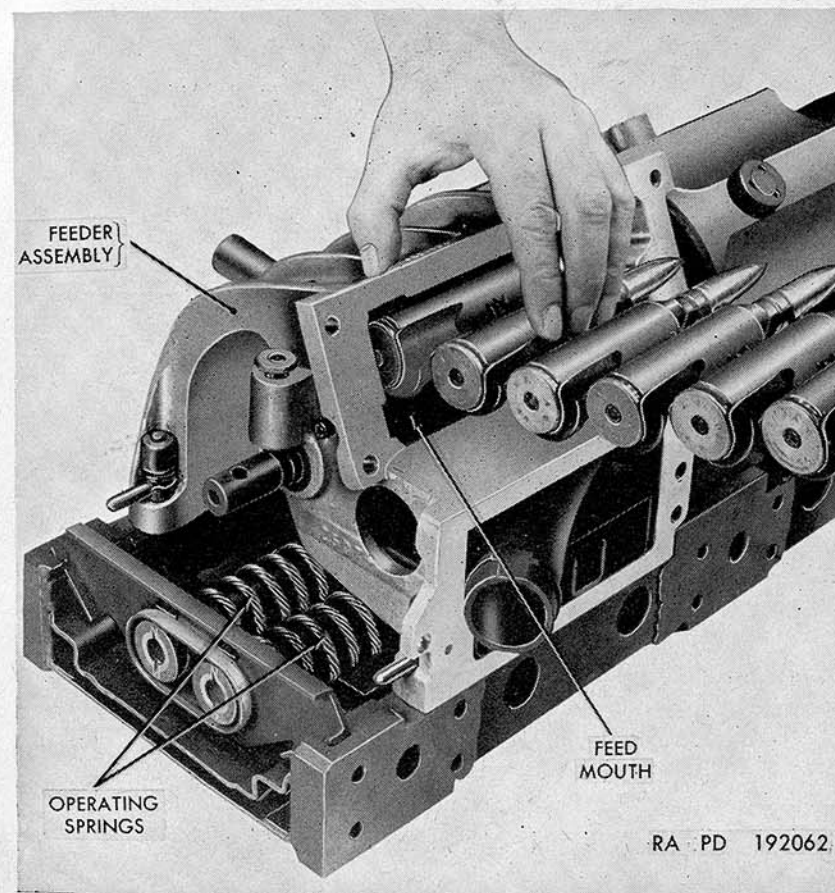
Loading belt into feeder assembly—feed chute removed—right-hand feed.
